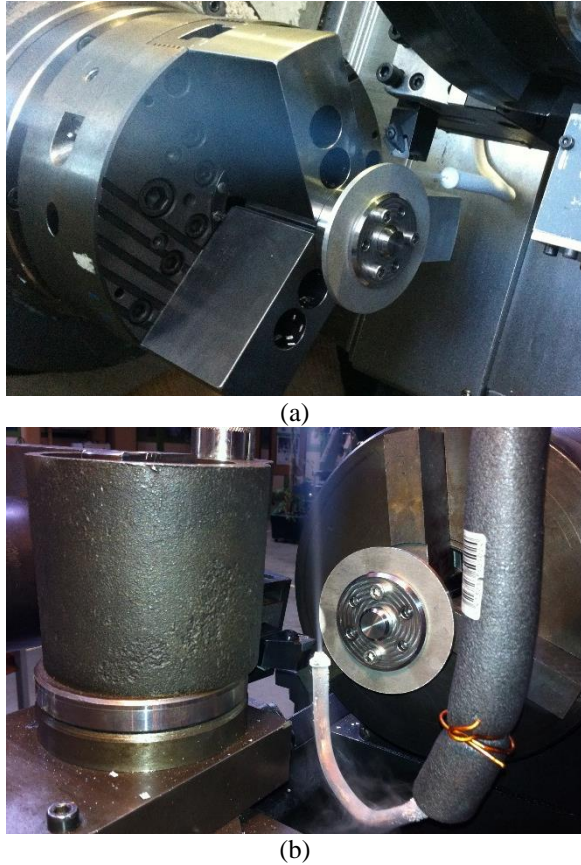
Experimental set-up: a) CNC lathe; b) convectional lathe
